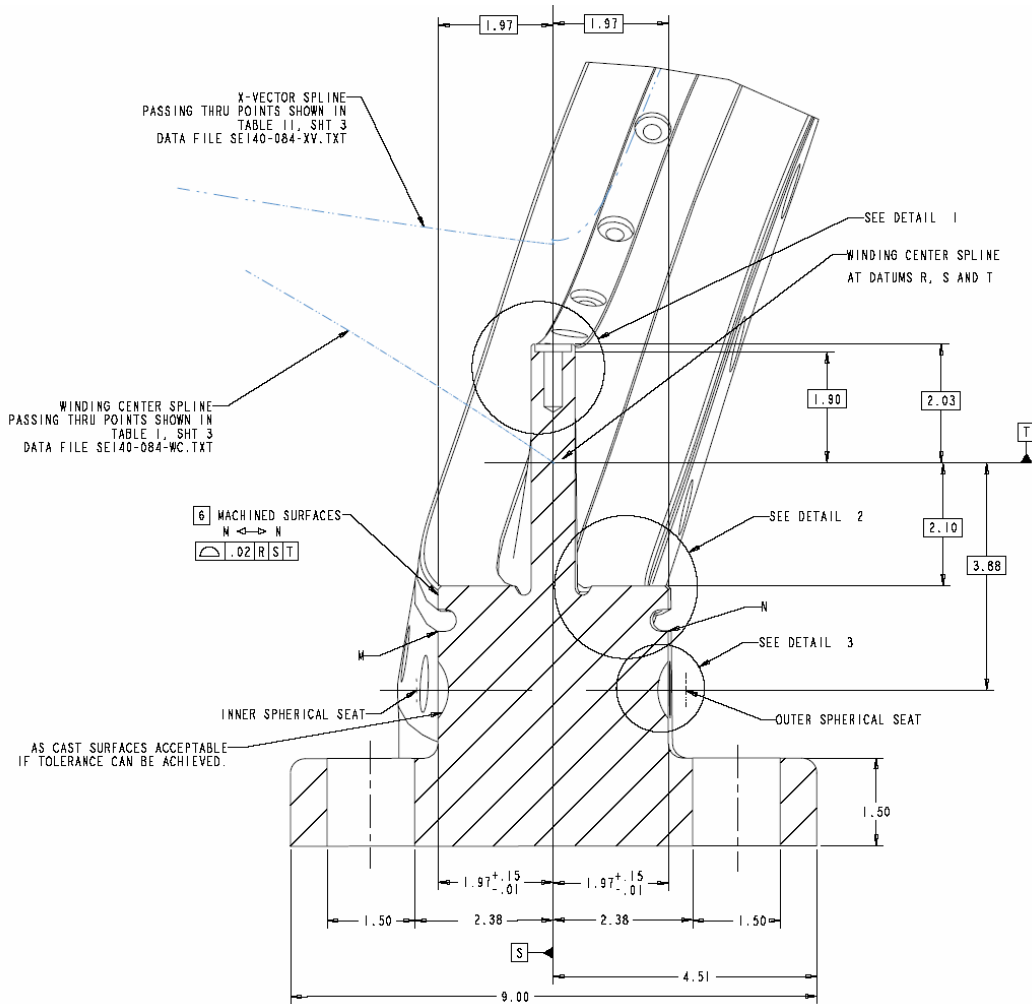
Winding Surface Dimensions and Tolerances (se141-116.drw)
